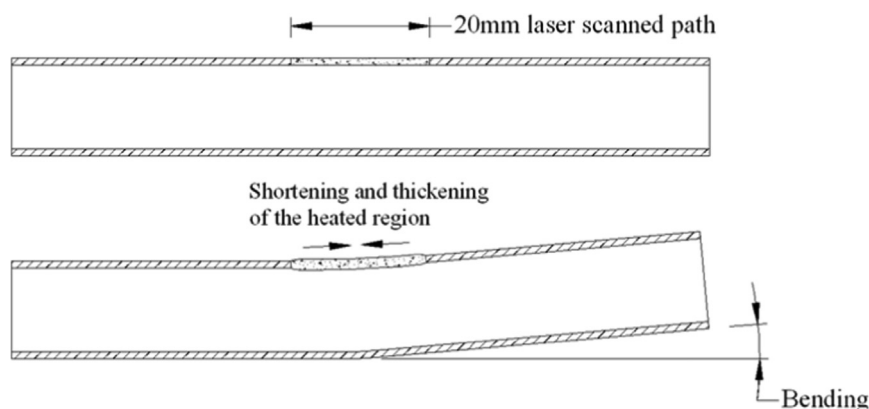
Schematic illustration of upsetting mechanism for axial scan tube bending.
